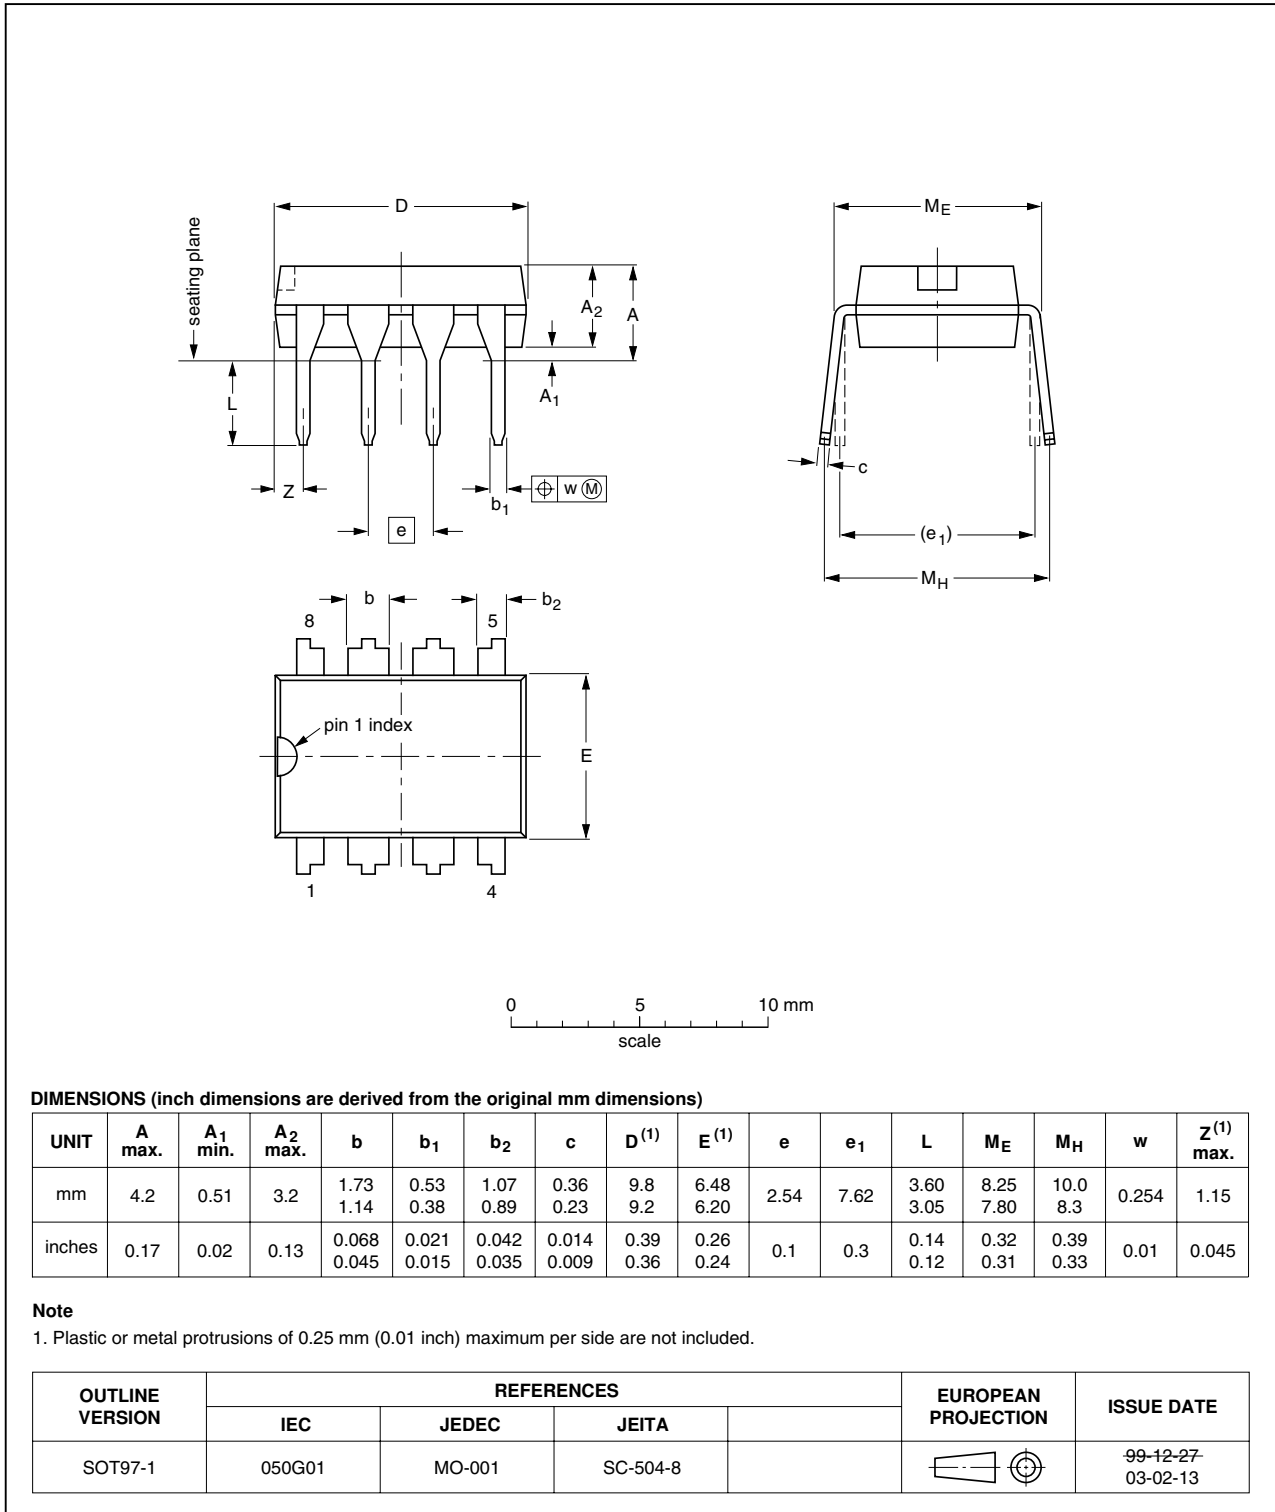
Package outline SOT97-1 (DIP8) of PCF8593P
